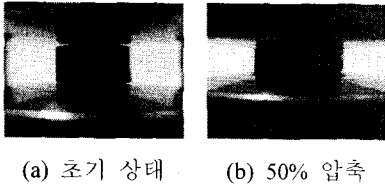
Samples deformed shape with 10% tapered platen and oil lubrication
